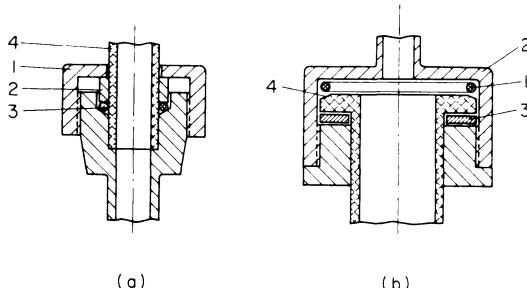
Special conical O-ring seals: (a) glass-to-metal connector (after Leblanc⁷⁵⁰); (b) indium O-ring seal (after Horwitz⁵⁹⁸); (1) indium O-ring; (2) cap; (3) washer; (4) collar with edge ground to 15° bevel (*Courtesy of The American Institute of Physics*)
